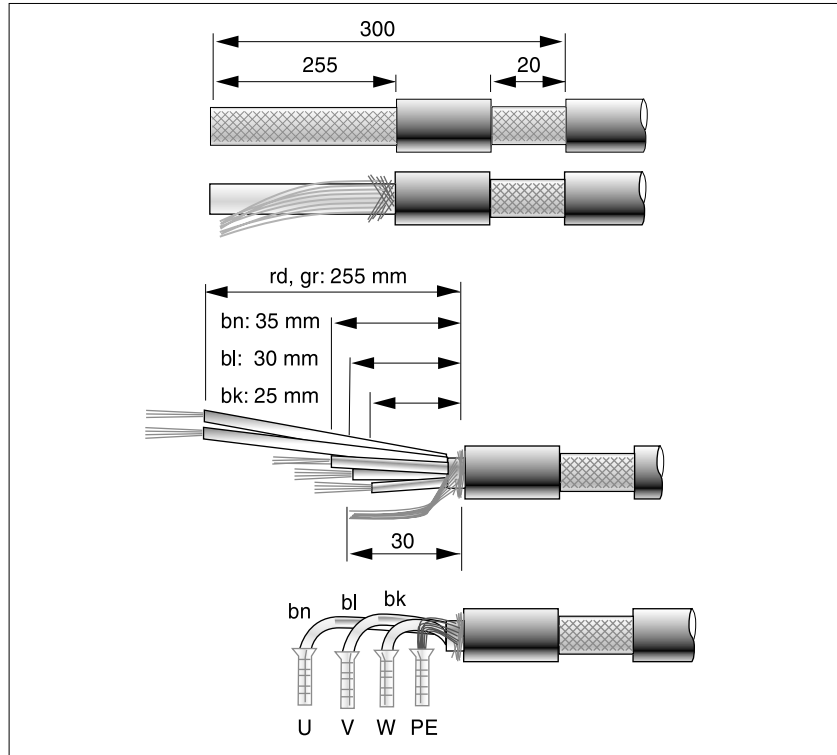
Preparing the motor cable for version P with integrated holding brake
